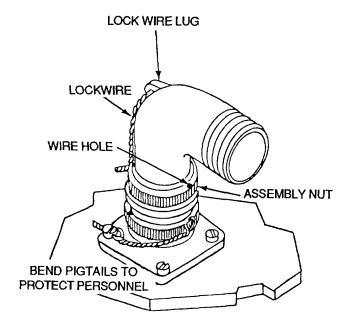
Lockwiring Assembly Nut Type Connectors (Typical)
